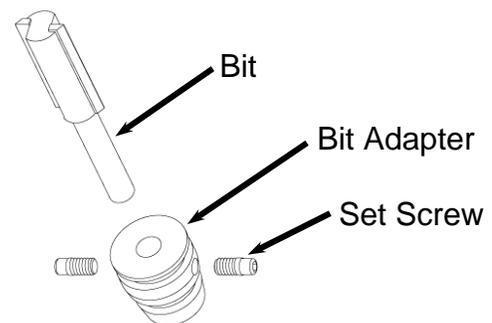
COLLET ARRANGEMENT FOR 1/4" SHANK BITS
